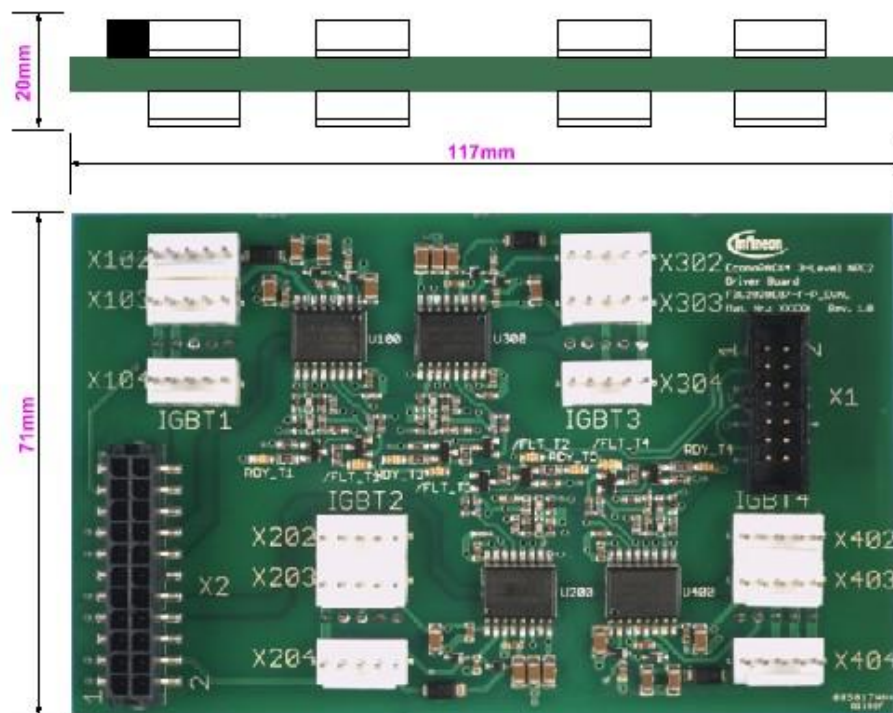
Mechanical dimensions of the F3L2020E07-F-P_EVAL
